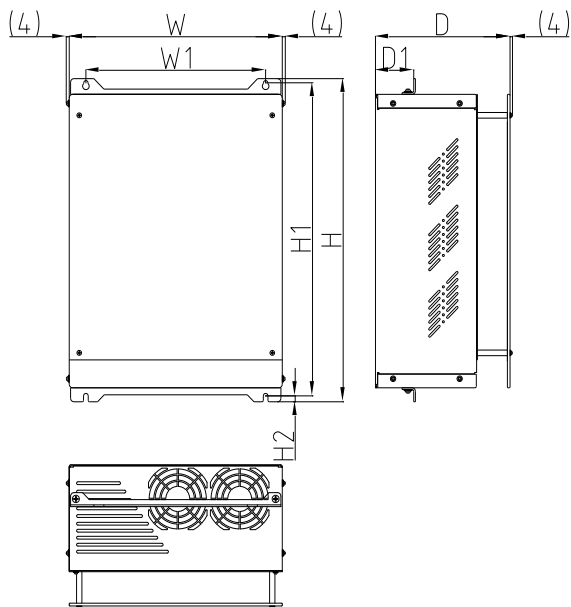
OPEN TYPE INSERTED DIMENSION
